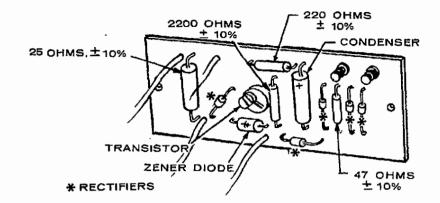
, 300-0573 LOAD SENSOR BOARD
